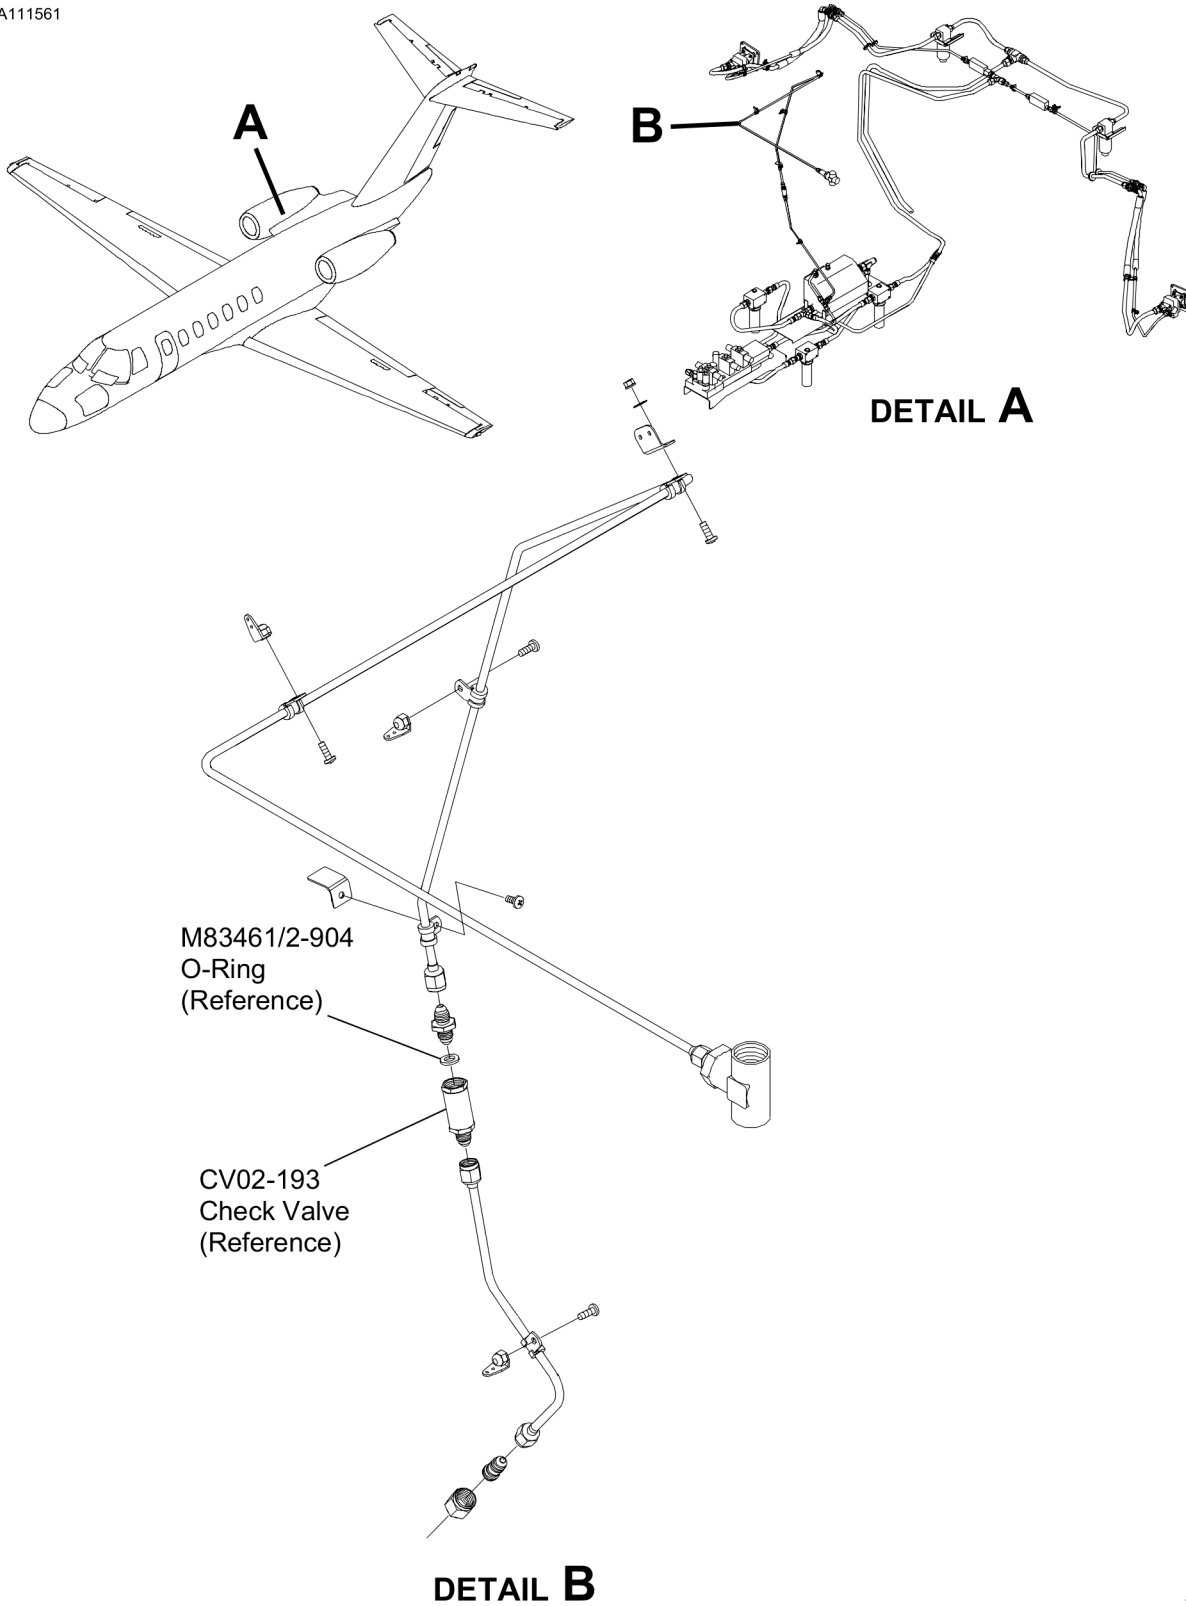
CV02-193 CHECK VALVE INSPECTION (Sheet 1)
